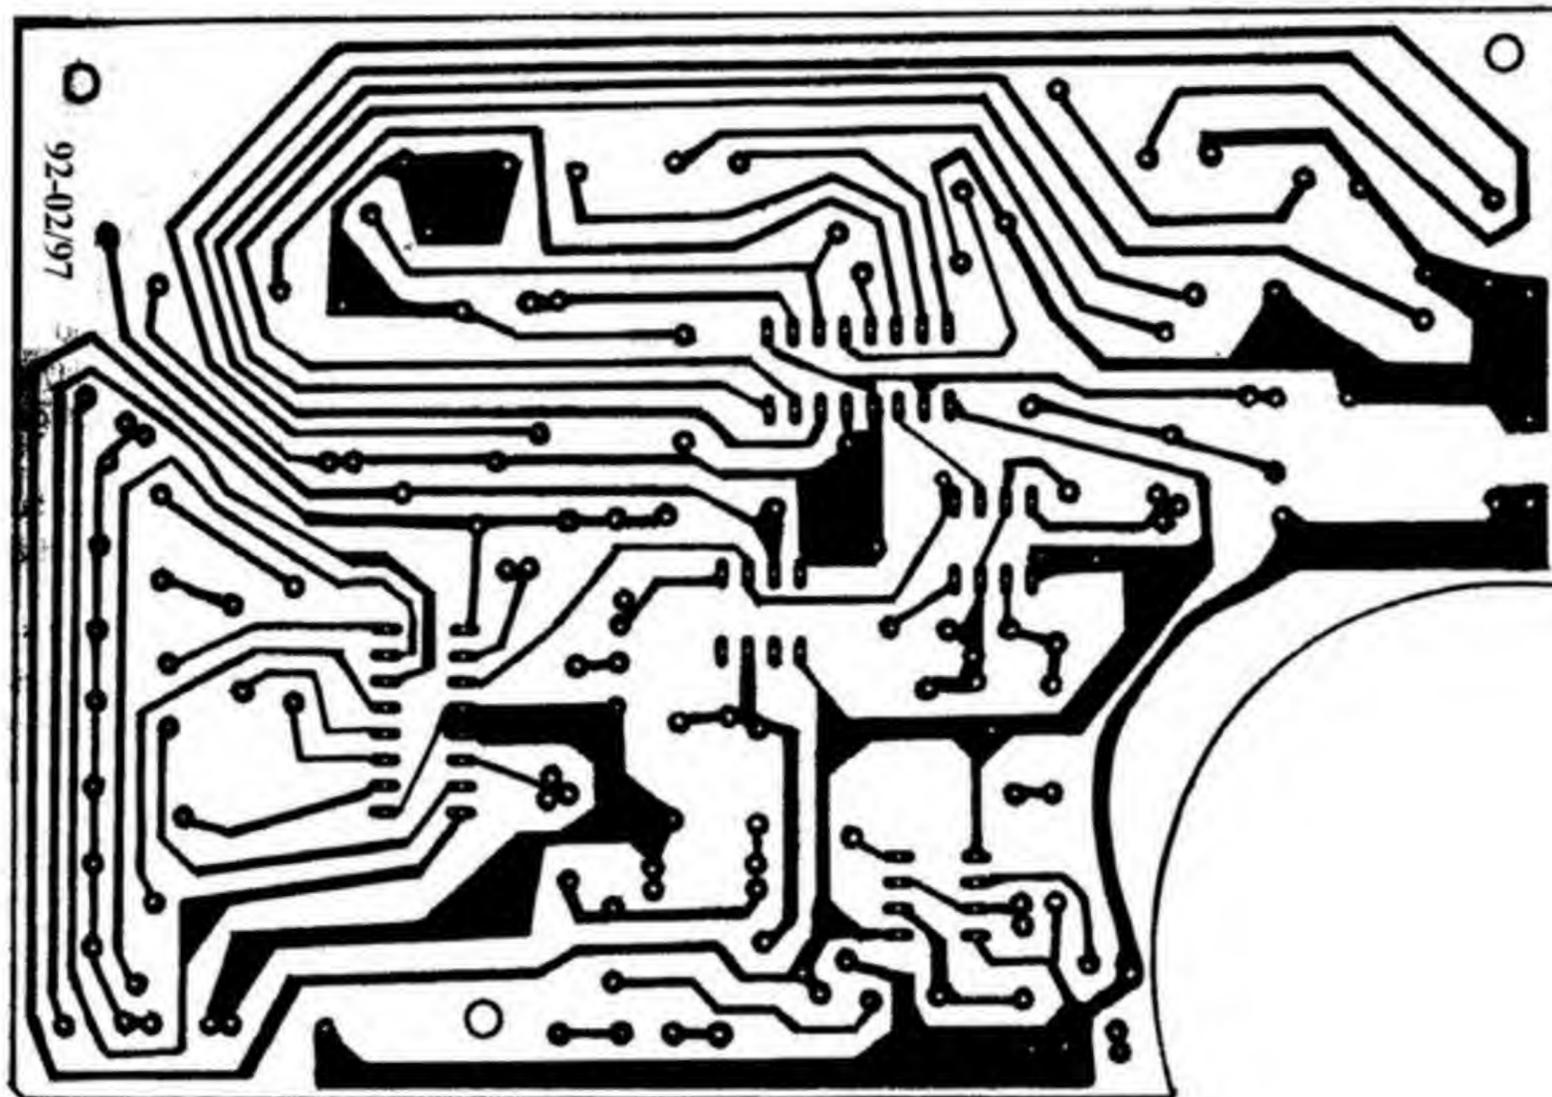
Actual-size PCB layout for the circuit shown in Fig. 1.
